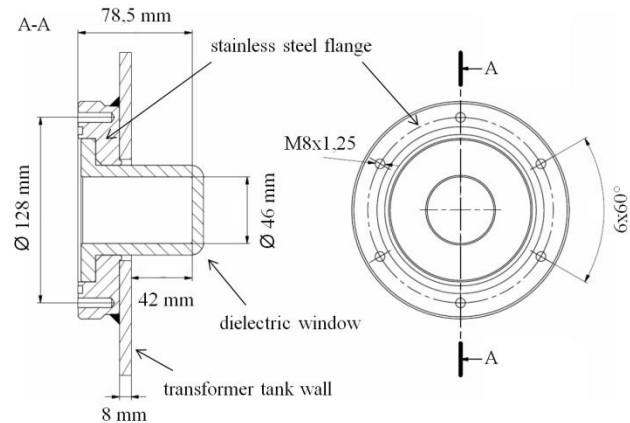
Dielectric window and welding ring for UHF plate sensors.
